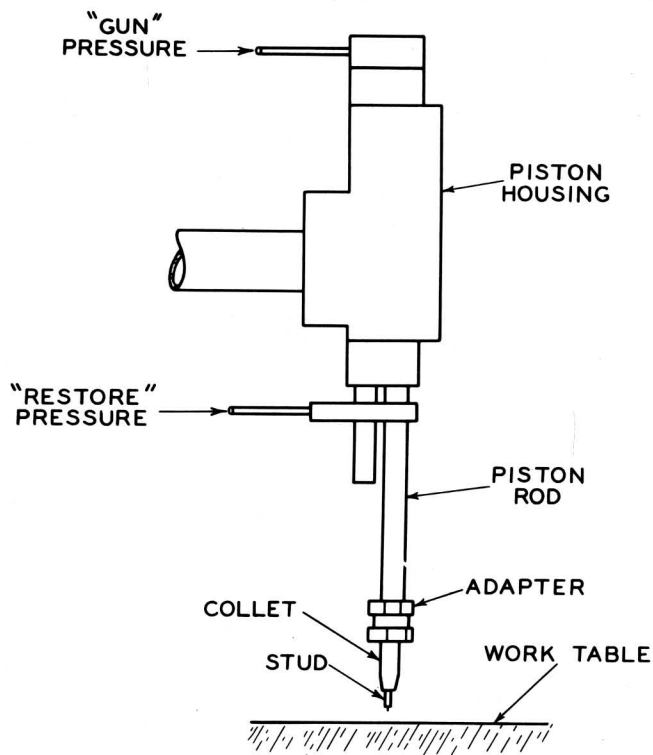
Welding gun used in assembly of developmental thyatron.
